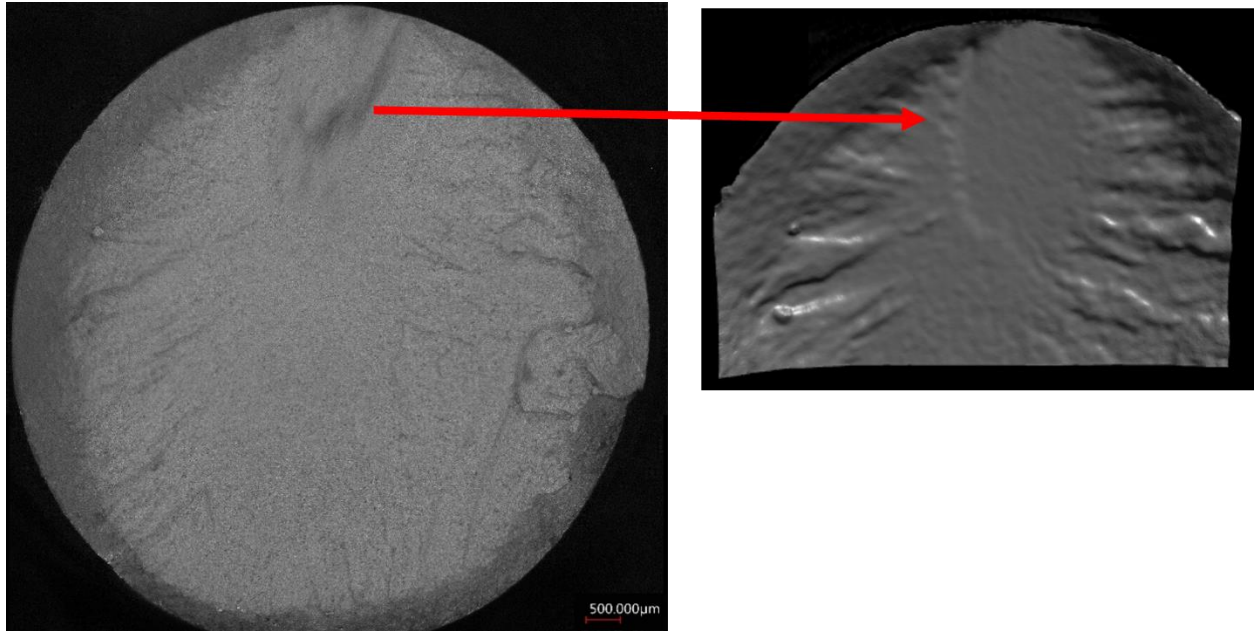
The fracture surface of the AFSD Z 6061-T6 #15 material and the topographical 3D rendering of the initiation site.
